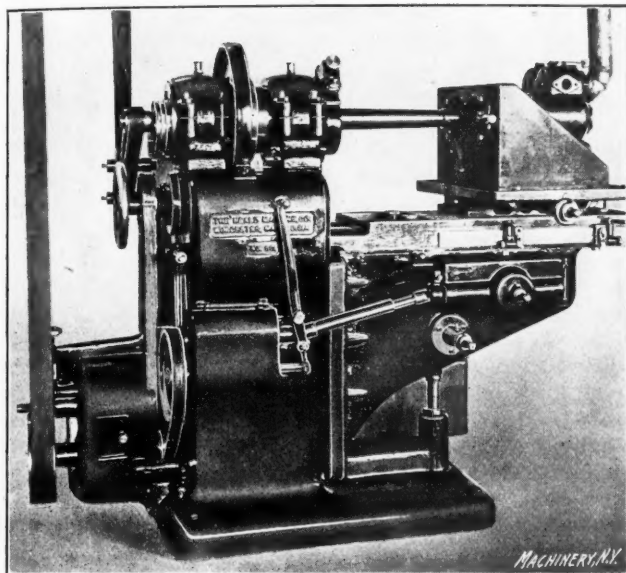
Heald Grinder used in Premier Factory, showing Exhaust Attachment for Drawing off the Iron and Emery Dust
